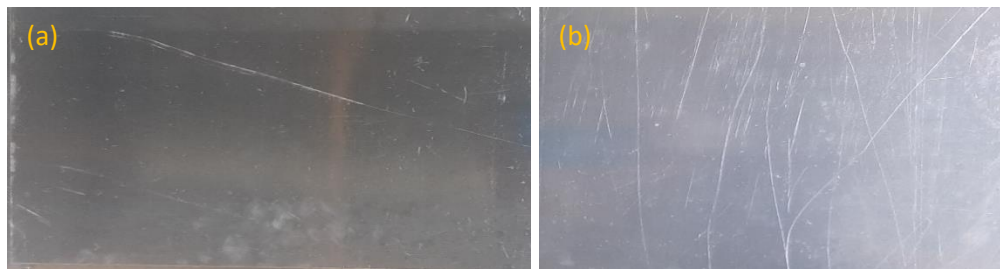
1 (a) & (b) 250 x 250 Aluminum 6063 sheet for SIF manufacturing
